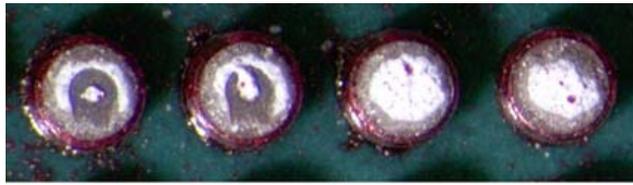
Dye Penetrant Testing of Centrally Located Solder Joints
